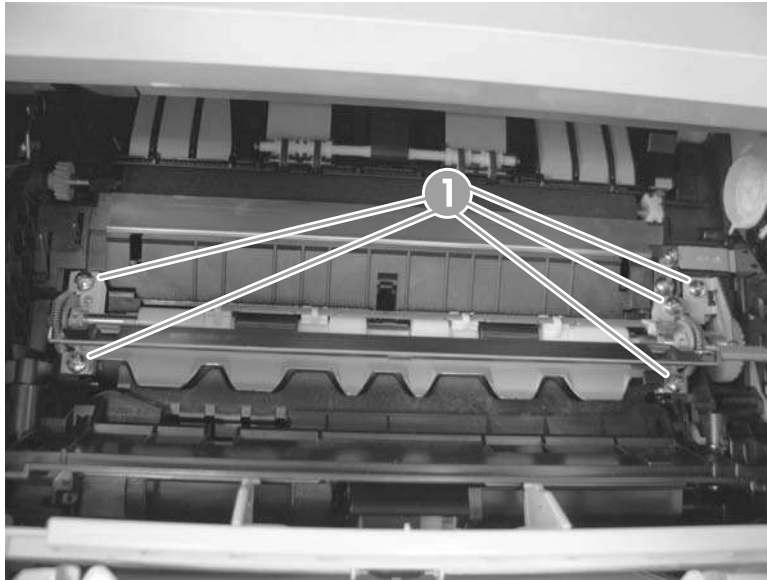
Remove the Tray 1 separation roller (3 of 3)
